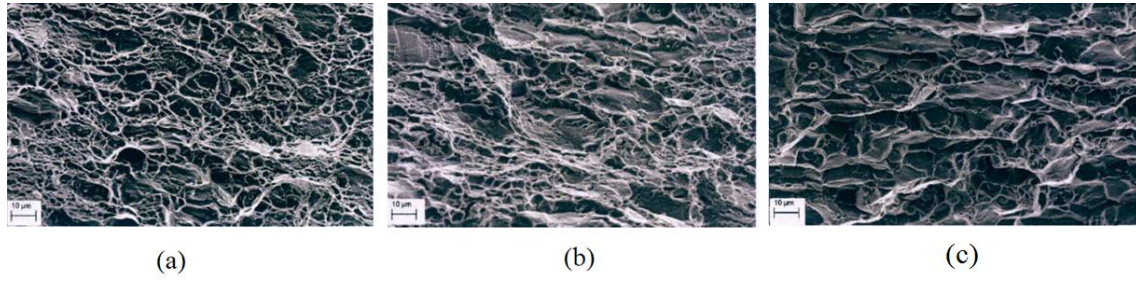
Fracture morphology on three positions (a) one end of the fracture (E1), (b) middle of the fracture (M) and (c) the other end of the fracture (E2).
